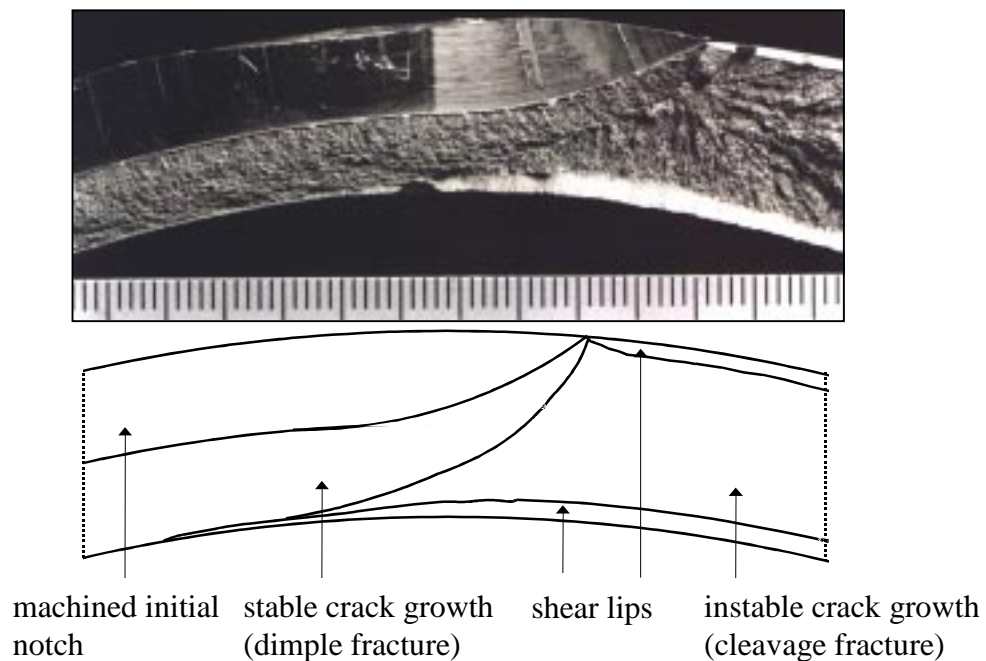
Sector of the fracture surface of pipe no. 2 with 90°-flaw, 1 scale division equals 1 mm
